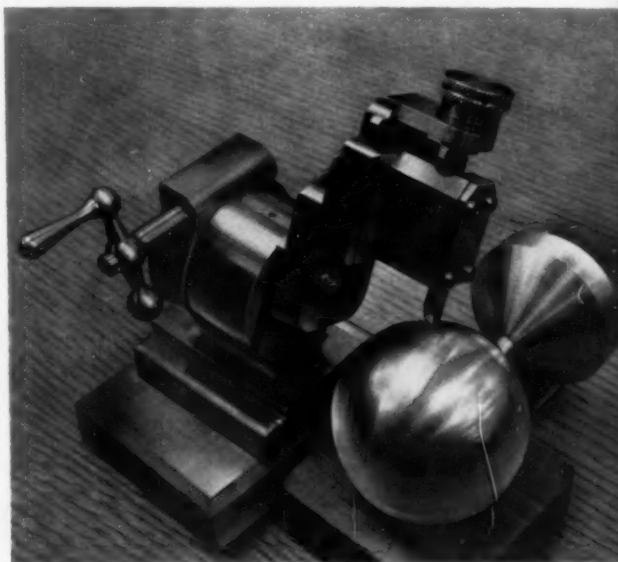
Ball-turning unit is clamped in a lathe in place of toolpost for spherical turning. Same device can be used to cut concave surfaces.
